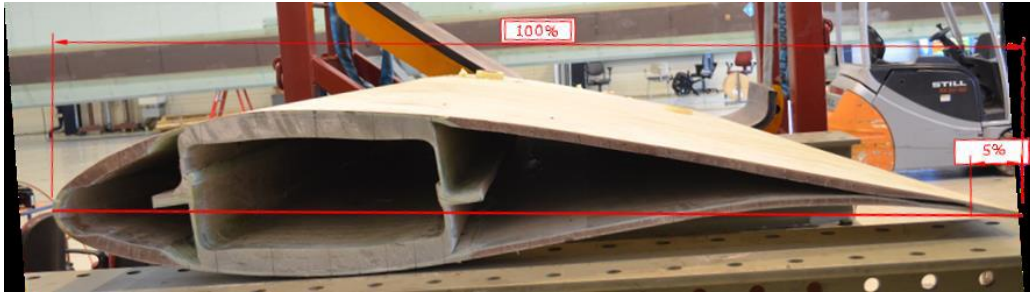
Adhesive line in a wind turbine blade cross-sectional view.
